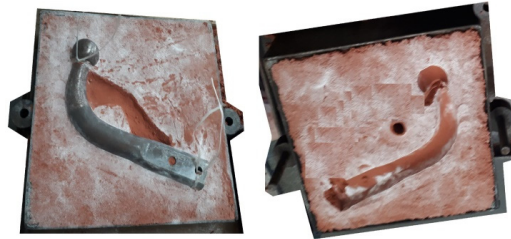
Forming the mold for casting. Left side: The model; Right: The negative.
